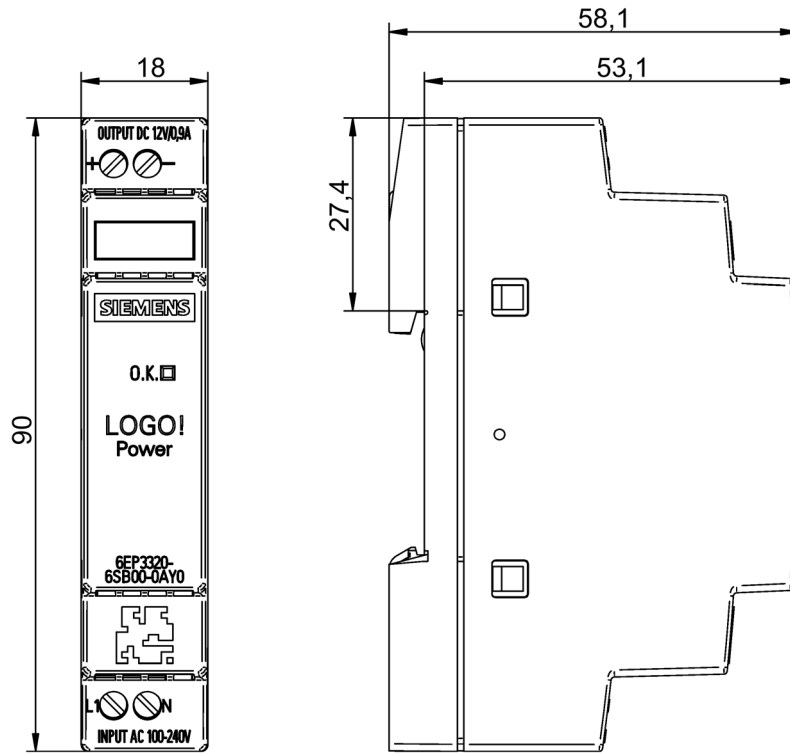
Dimension drawing for 6EP3320-6SB00-0AY0 and 6EP3330-6SB00-0AY0
